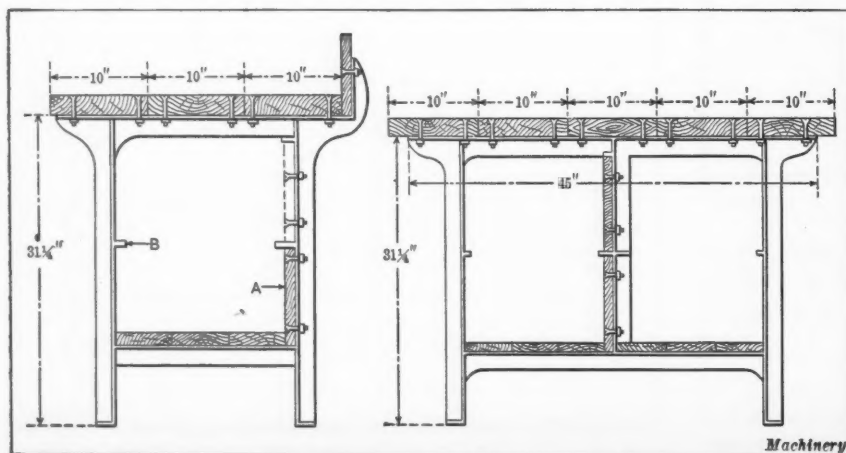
Sections of Single- and Double-width Benches equipped with Cast-iron Legs
